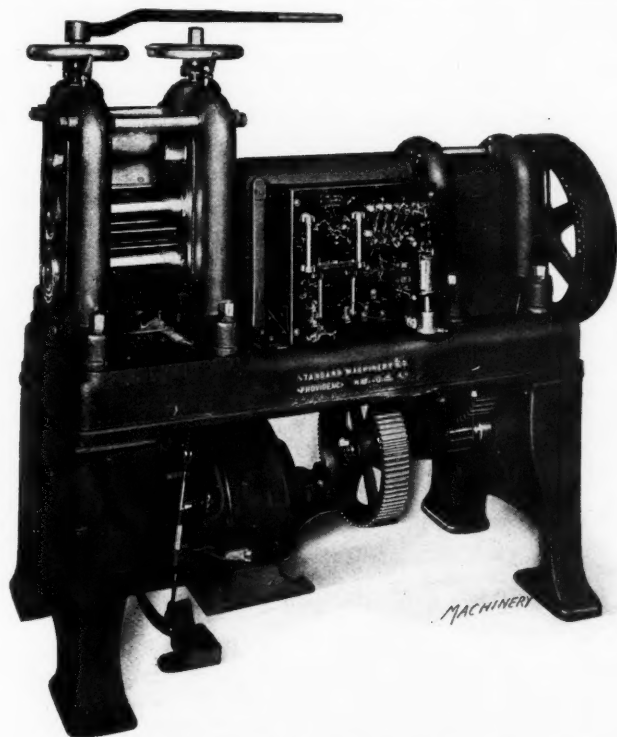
Standard Rolling Mill with Constant Speed Motor Drive
